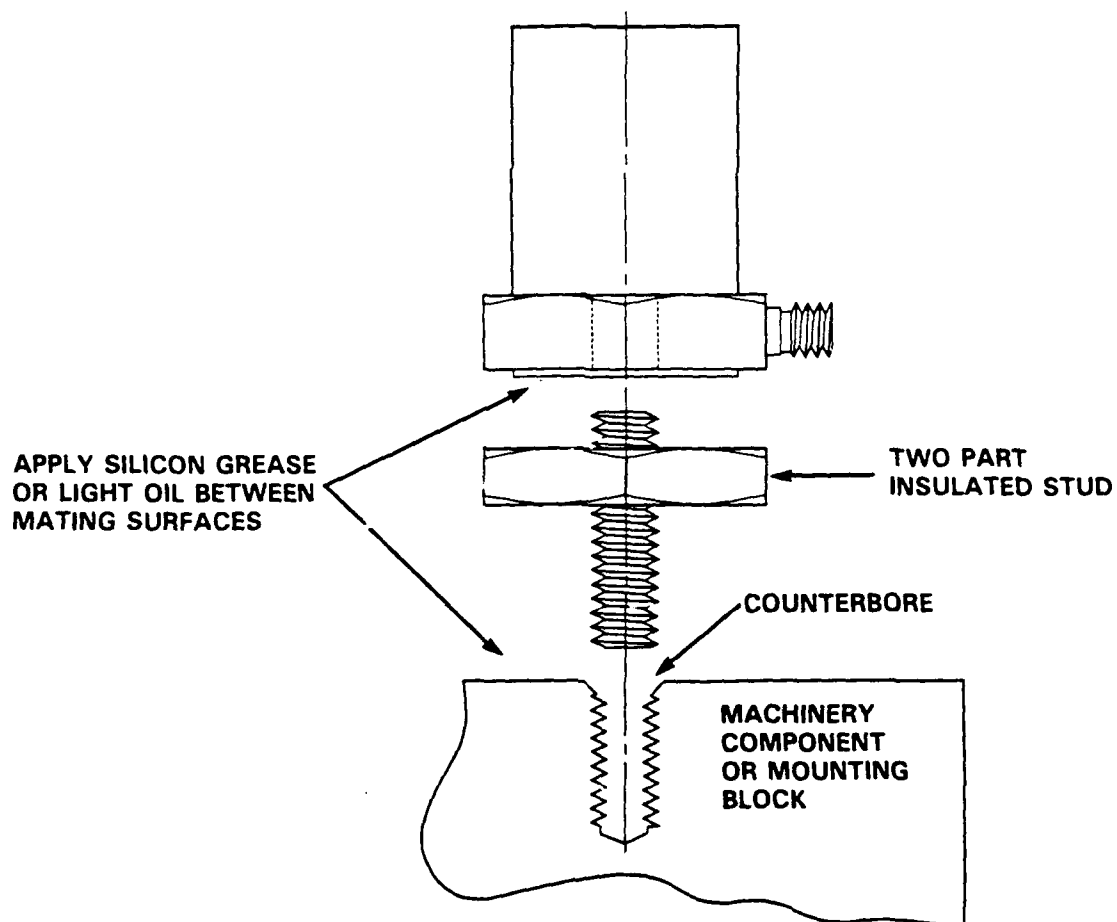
Stainless steel insulated stud used to electrically isolate the accelerometer from the machinery part.
